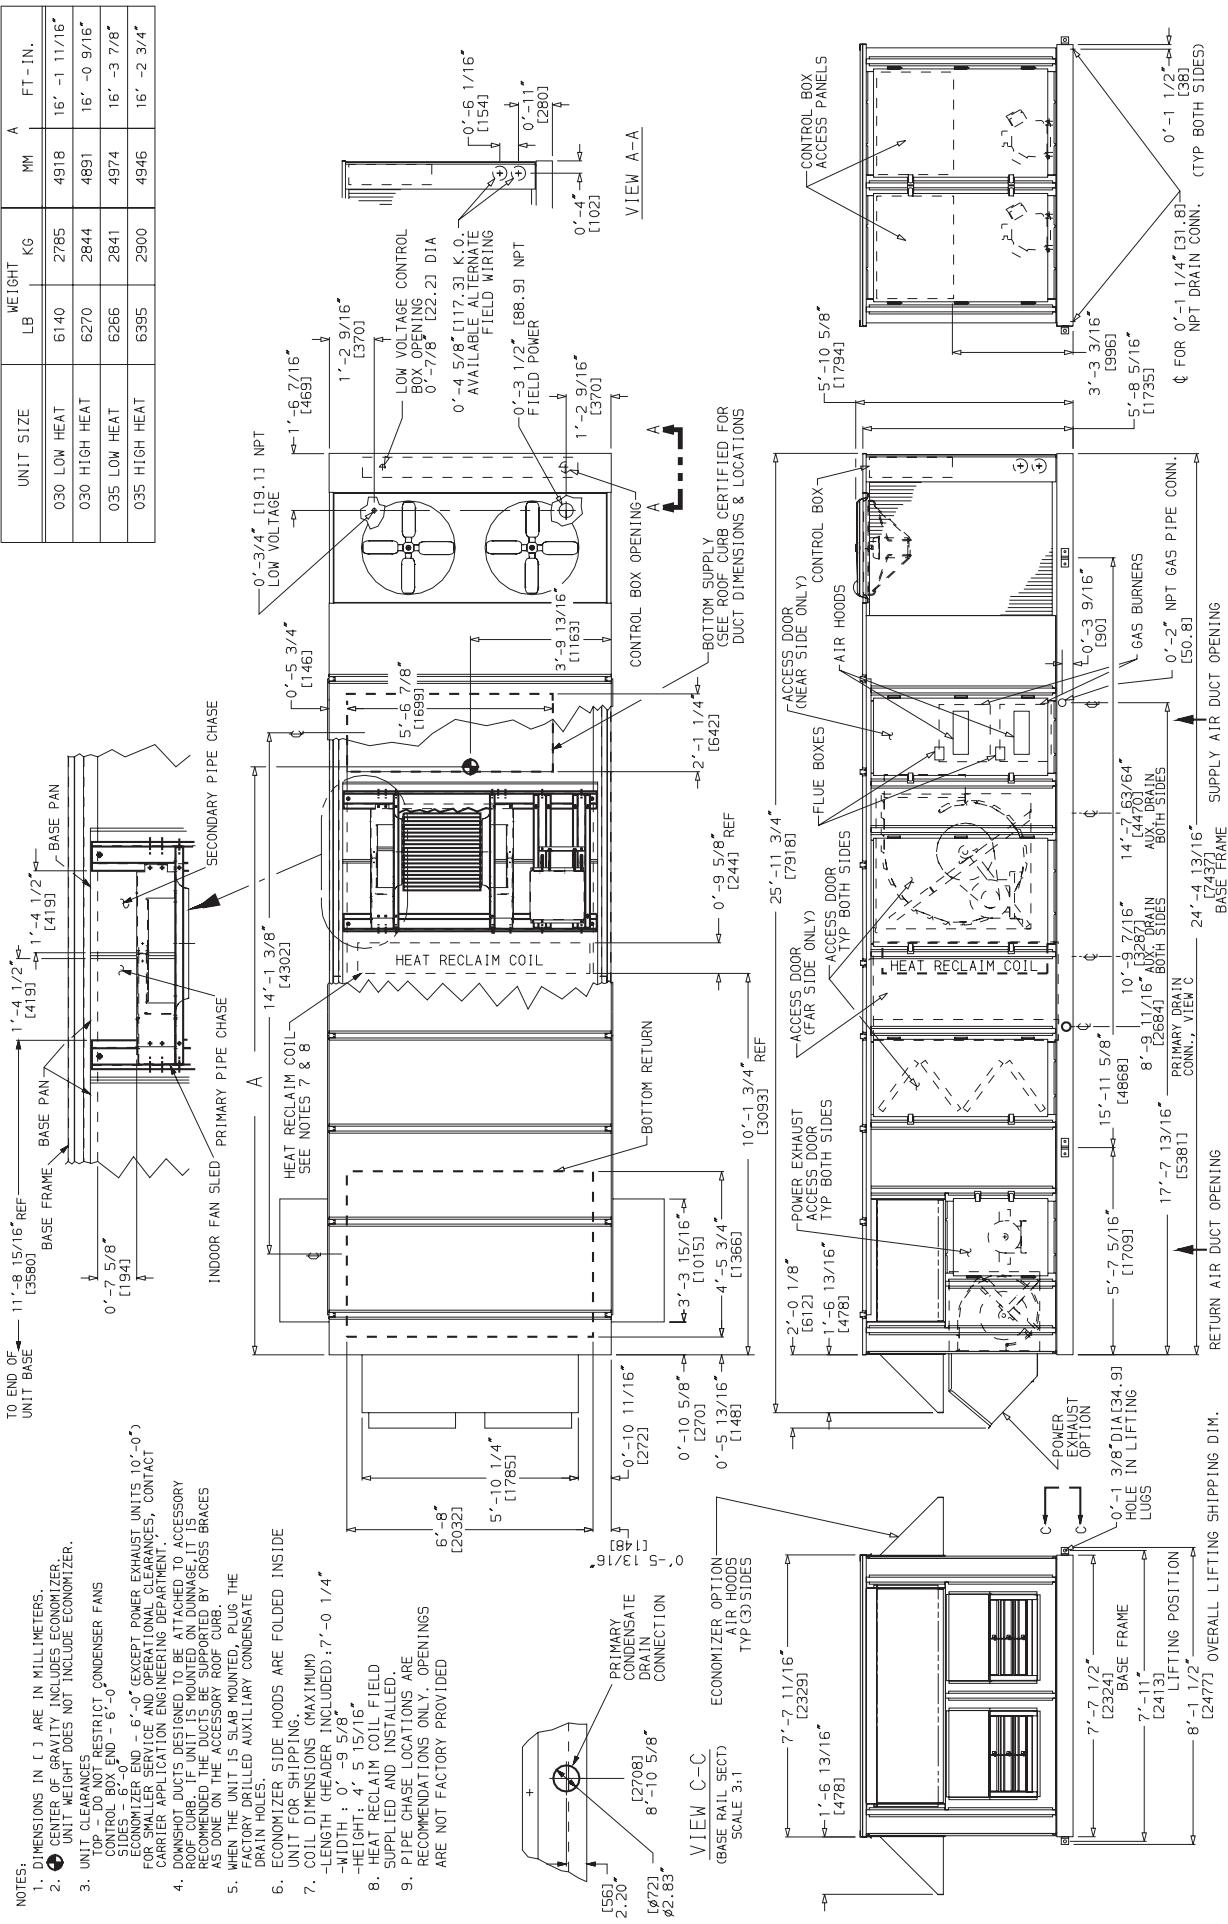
Base Unit Dimensional Drawing — 48ZG,ZN030,035 (Extended Chassis)
